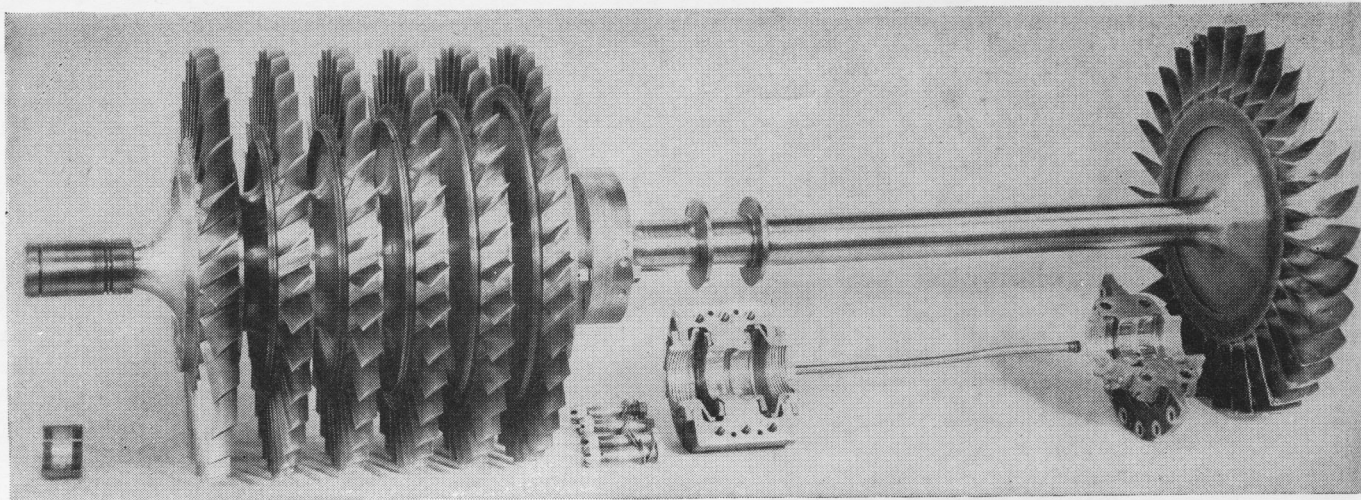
The compressor spindle of the 19-B is machined from a single forging, as are the turbine disk, shaft, thrust faces, and coupling flange. The front (No. 1) and turbine (No. 3) bearings are radial only; the thrust (No. 2) takes both thrust and radial loads.
